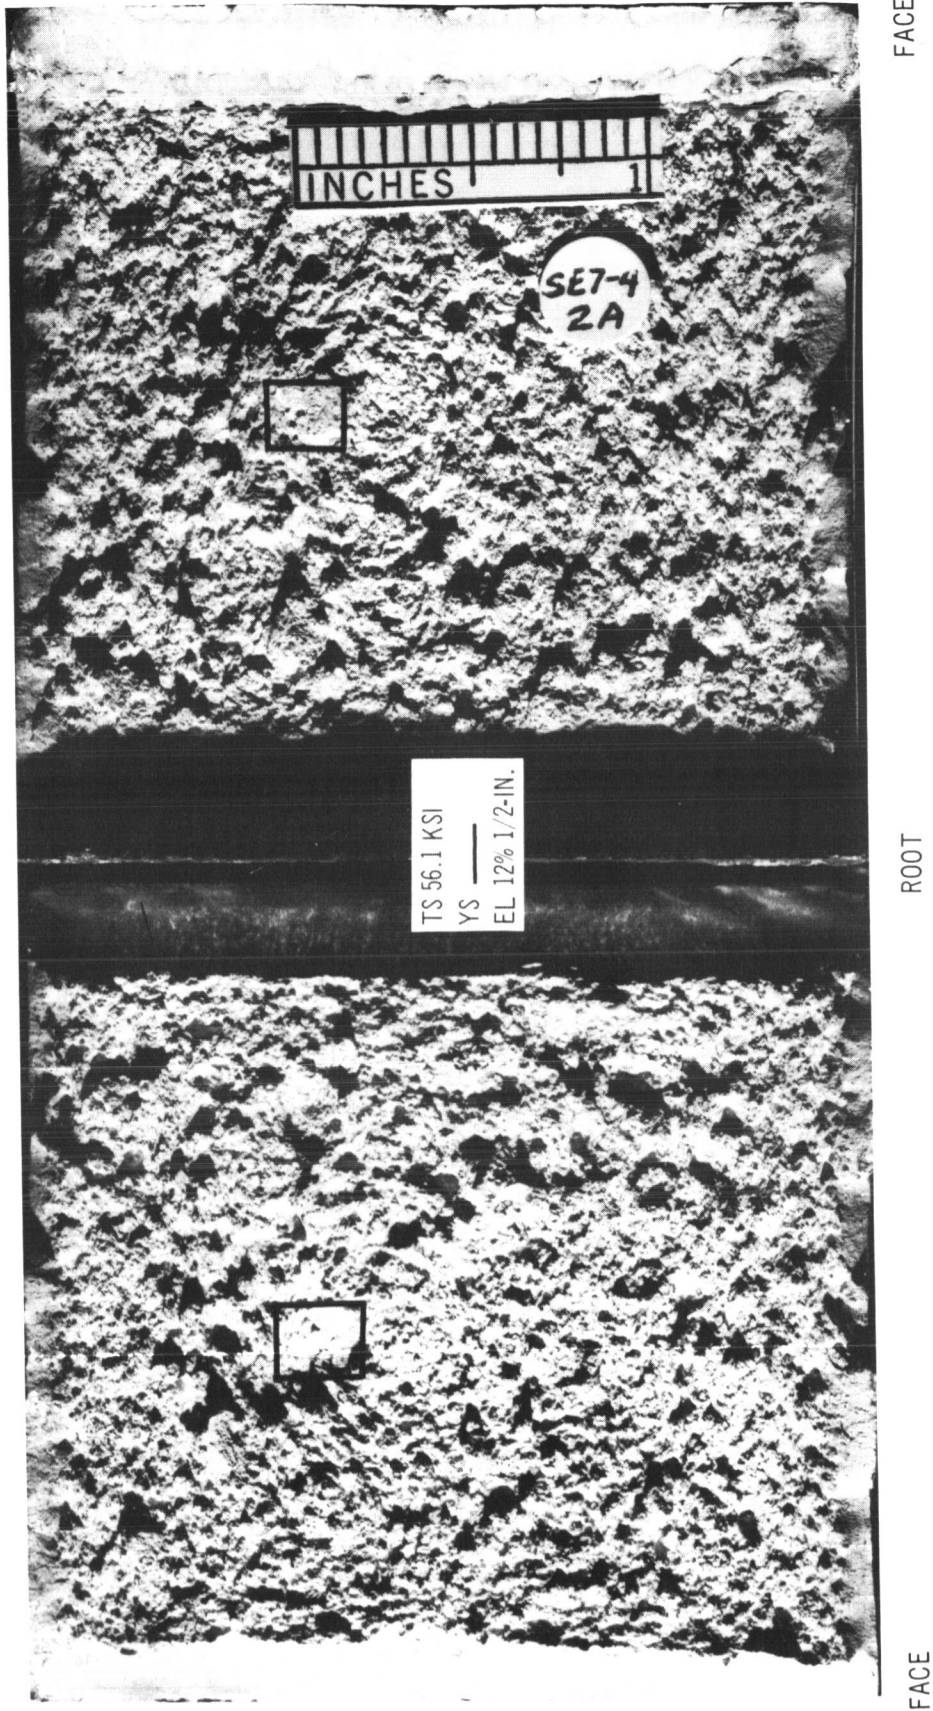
FRACTURE SURFACES OF 2-3/8-IN. THICK HIGH STRENGTH EB WELD. SOME POROSITY, ONE FLAT SPOT NEAR CENTER.
